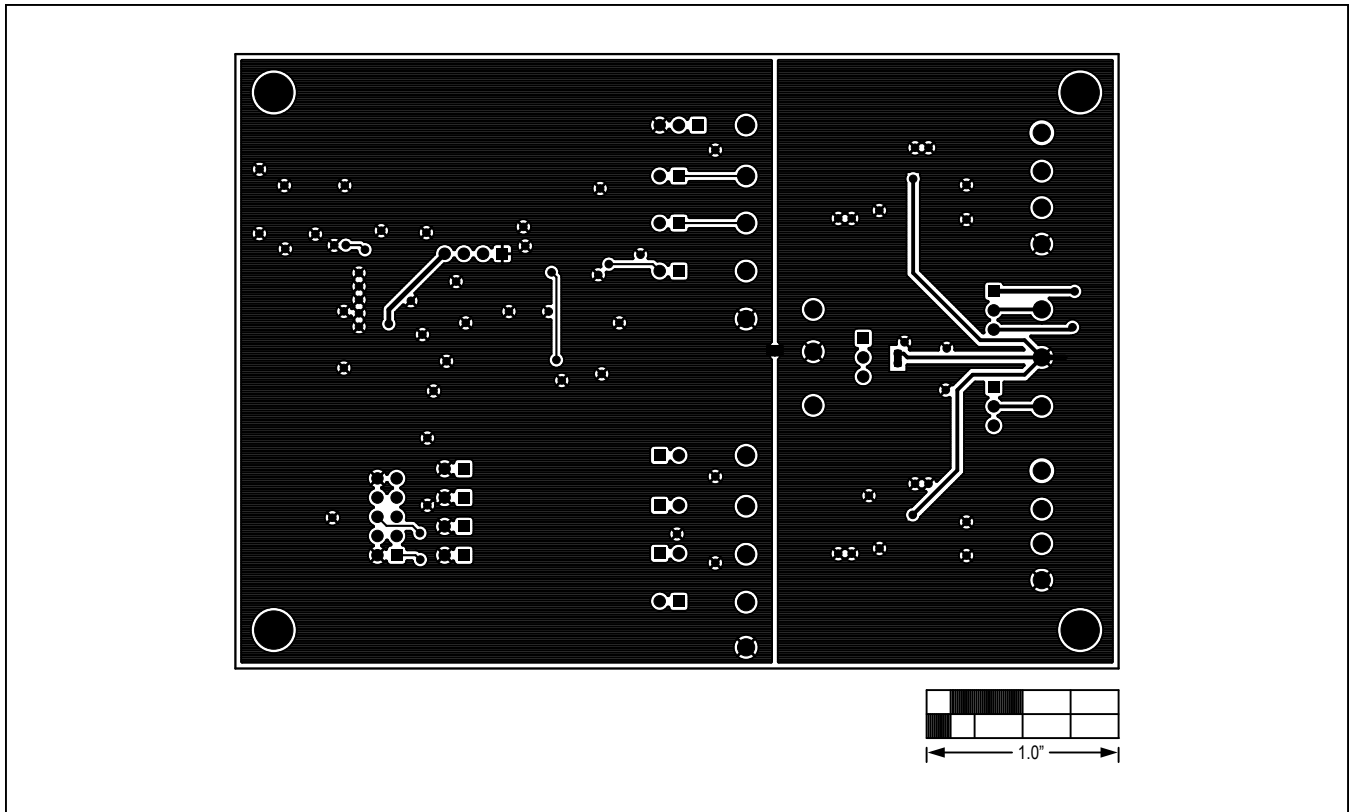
MAX5X02 EV Kit PCB Layout—Solder Side
